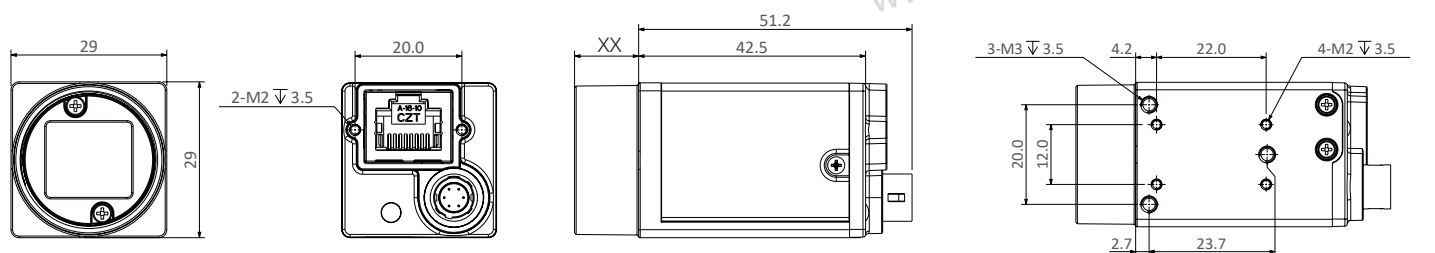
Mechanical Dimensions (in mm) for GigE Cameras with 29\*29\*42mm housing.
